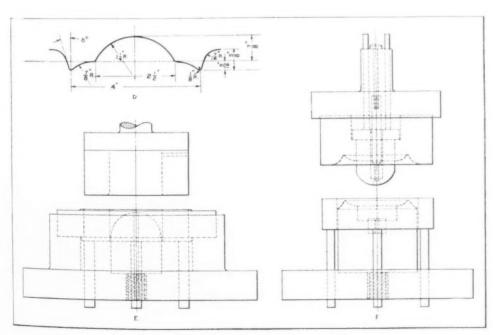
(D) Cross-section of Lamp Base; (E) Die Used to Blank and Form Shell A, Fig. 2; (F) Second-operation Forming Die that Produces Work Shown at B, Fig. 2
